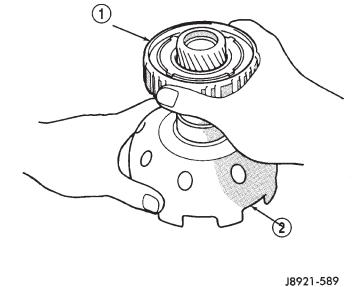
Removing/Installing Brake Hub And Clutch Assembly
